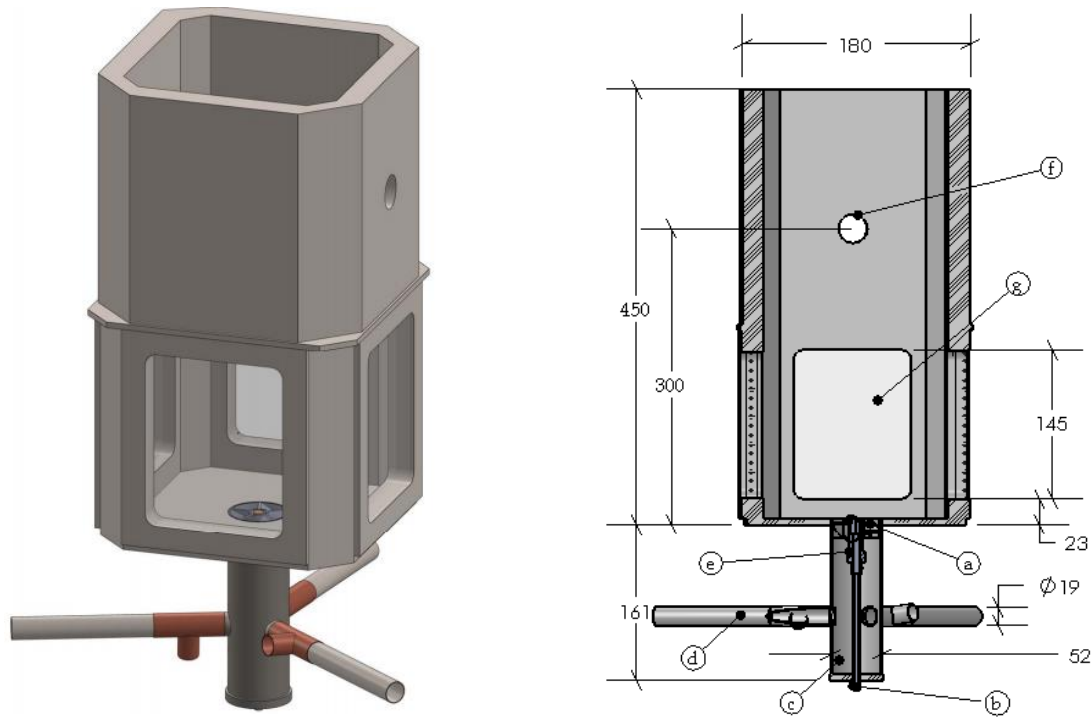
(left) 3D CAD of burner set-up (right) 2D section view showing (a) axial swirler (b) liquid fuel line (c) inlet plenum (d) combustion air/syngas inlet (e) pressure atomiser (f) emissions probe slot (g) quartz window. All dimensions in millimetres.
